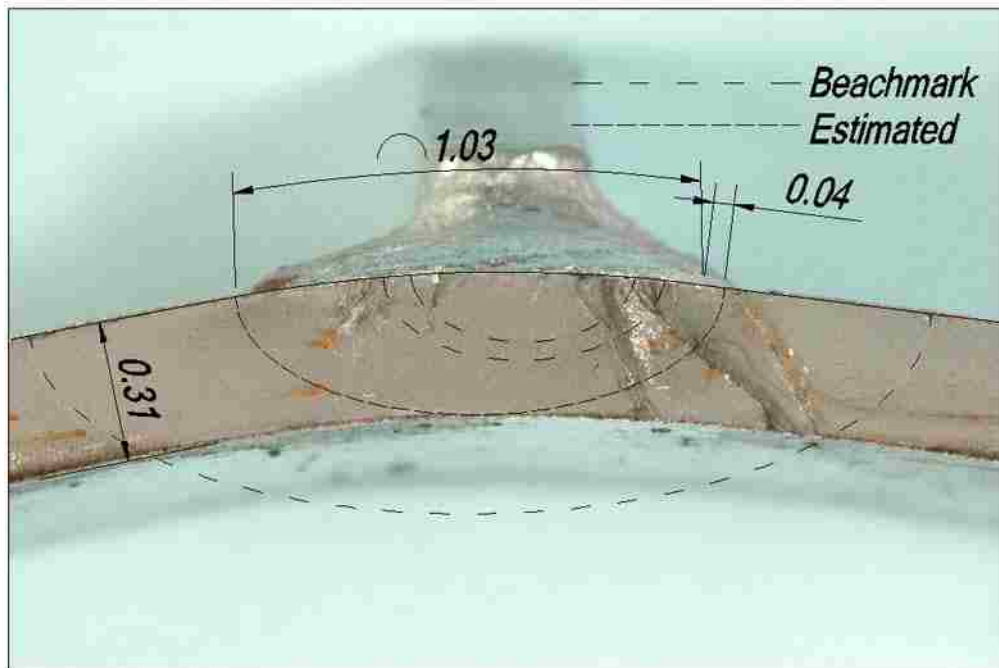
Specimen XII-2 fracture surface with observed beach marks
